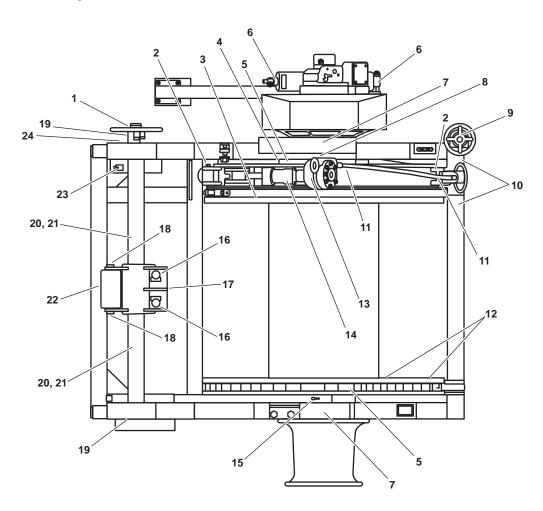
Towing Machine Lubrication Points (Starboard Side Showing, Port Machine Opposite Hand)
